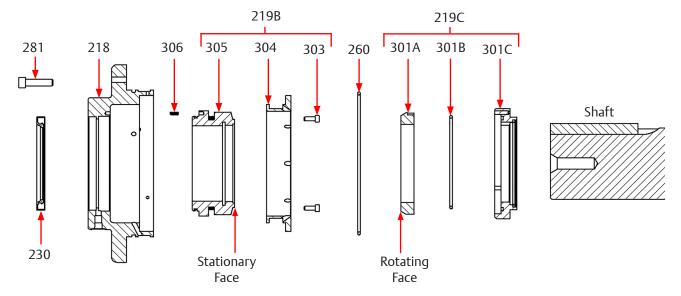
Shaft Seal Breakdown (28985W Only)
